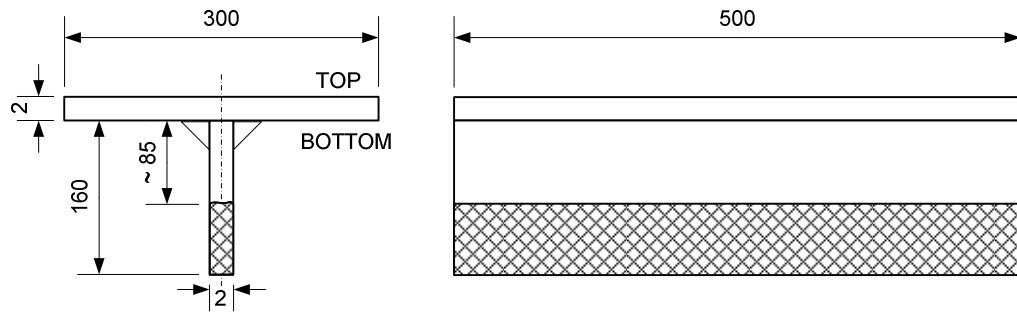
Sample dimensions and reduction of the vertical stringer height of fillet welded mild steel specimens (supplied by the Welding Engineering Research Centre at Cranfield University).
